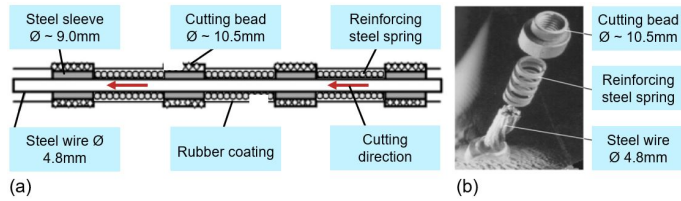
(a) Schematic side view of the diamond wire ([1]) (b) Exploded view of the diamond wire ([1])
